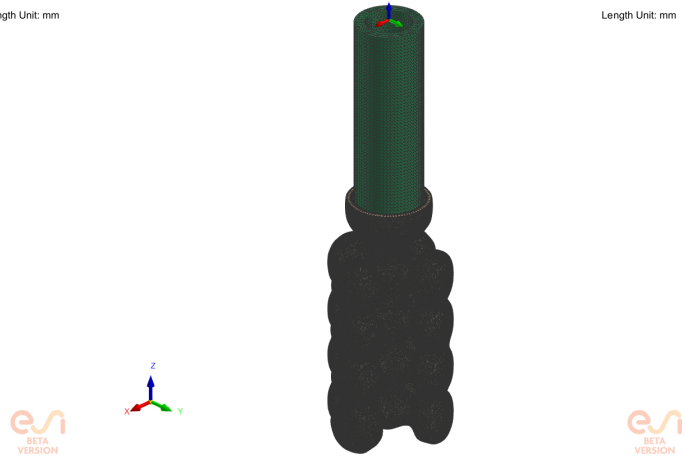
Meshed investment casting shell mould created around crucible assembly
